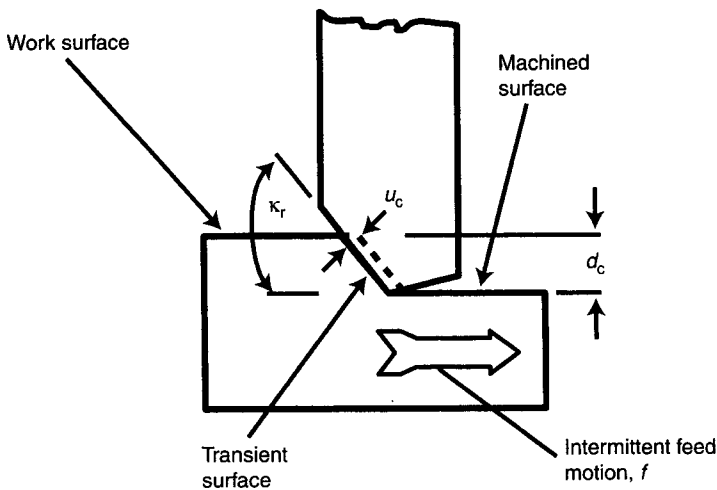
Workpiece-tool geometry during planing and shaping.
